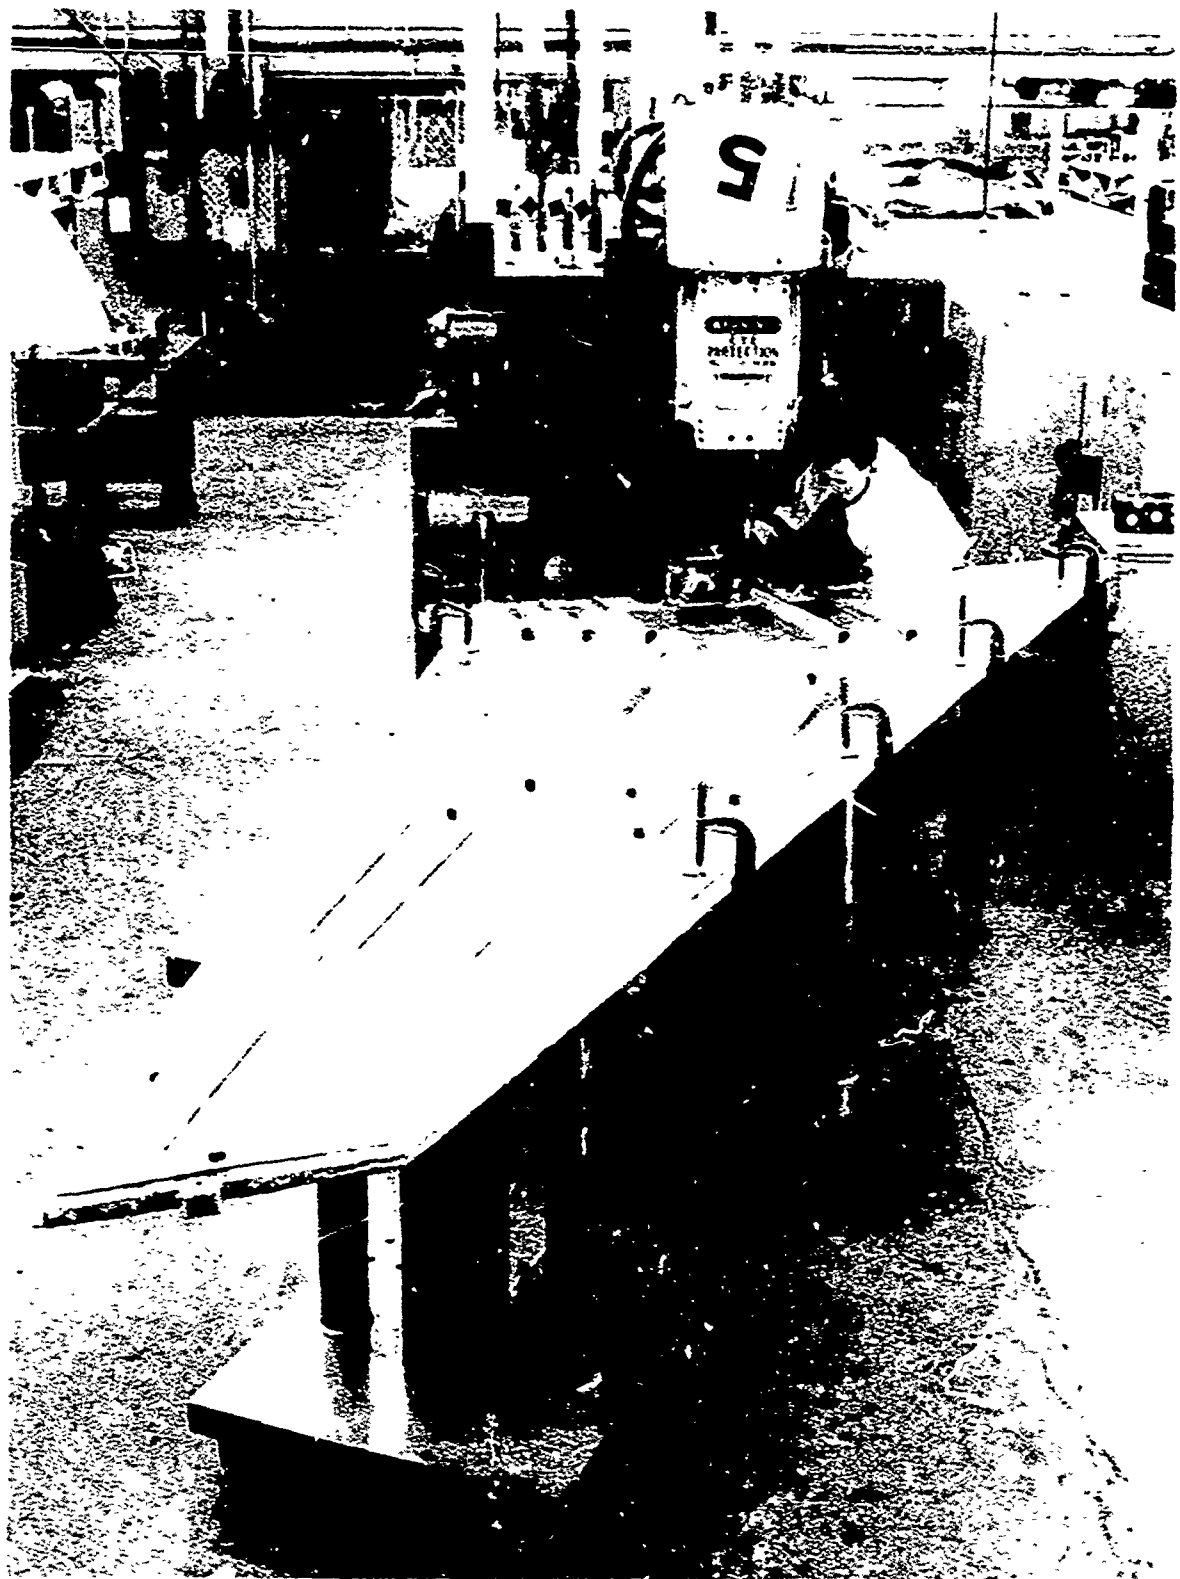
A SPOT-WELDING OPERATION ON THE UPPER SKIN SUBASSEMBLY (RET. 90)
